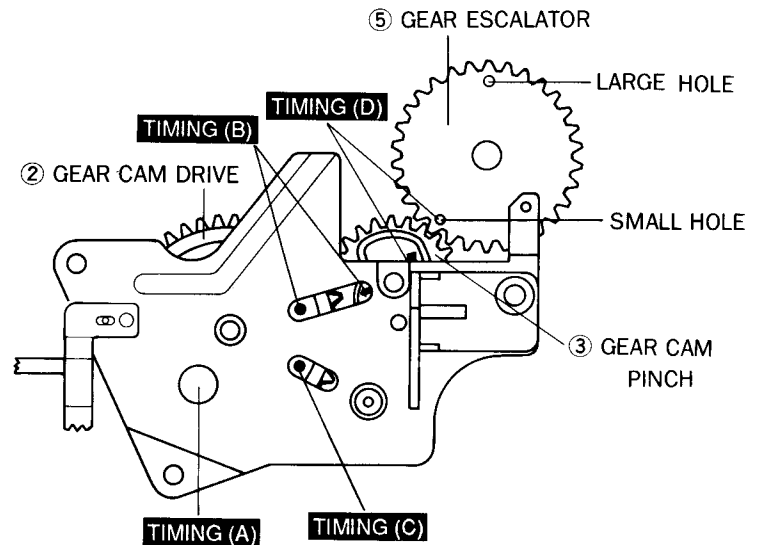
Reassembly of Drive Pinch Ass'y & Gear Escalator
